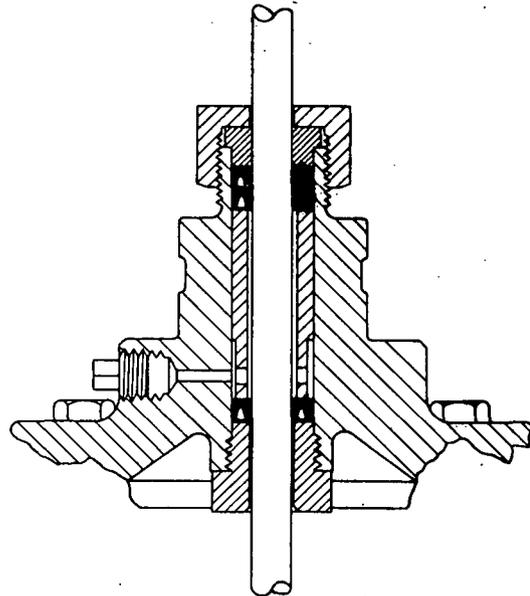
Detail of Packing Gland with Upper and Lower U-Cups and Spacer
